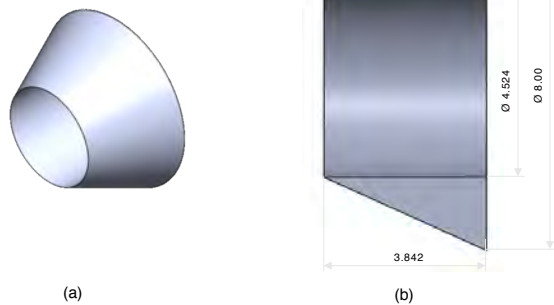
Primary nozzle collar (a) isometric view and (b) dimensioned cross section view (all dimensions are in inches)
